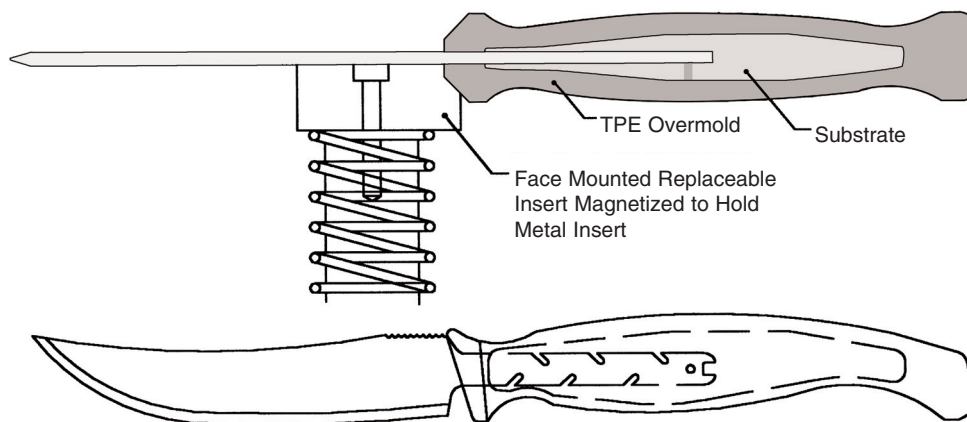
Spring-Loaded insert for Metal Tolerances
